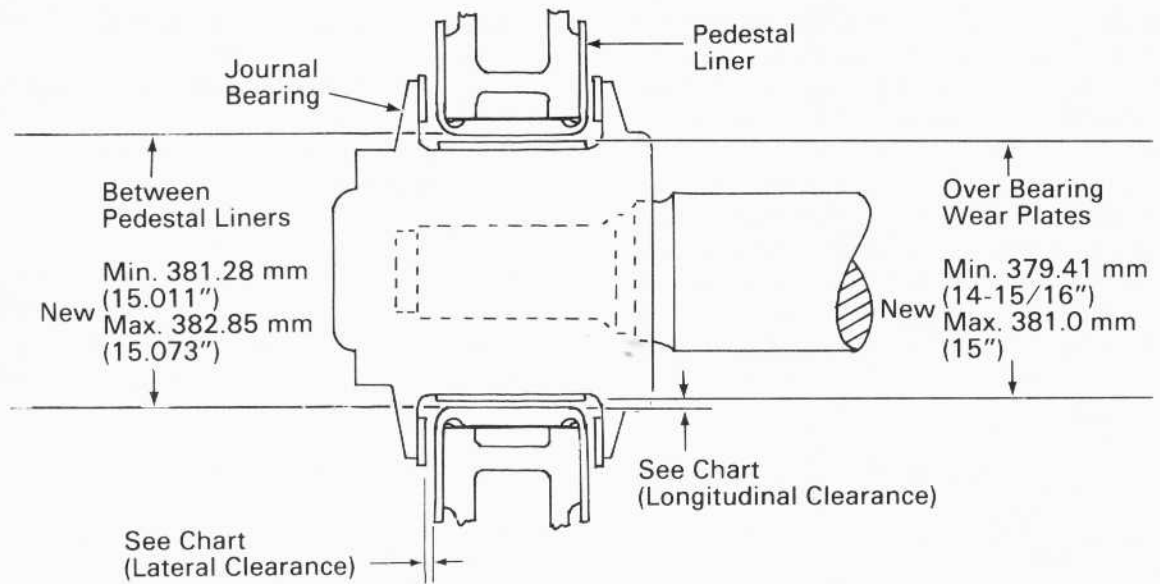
Pedestal Liner-To-Cylindrical Journal Bearing Clearance
